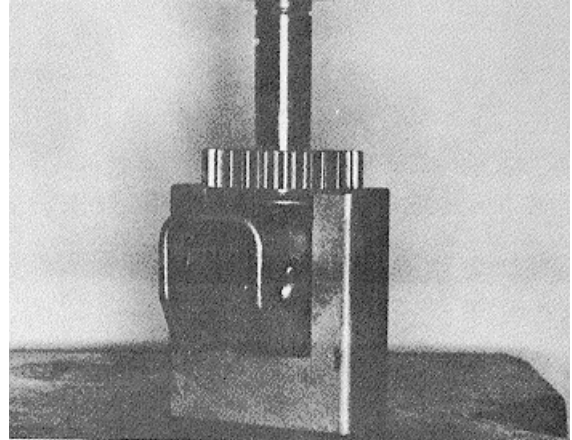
, F5285. Removing gear from weight carrier with ST-1231
